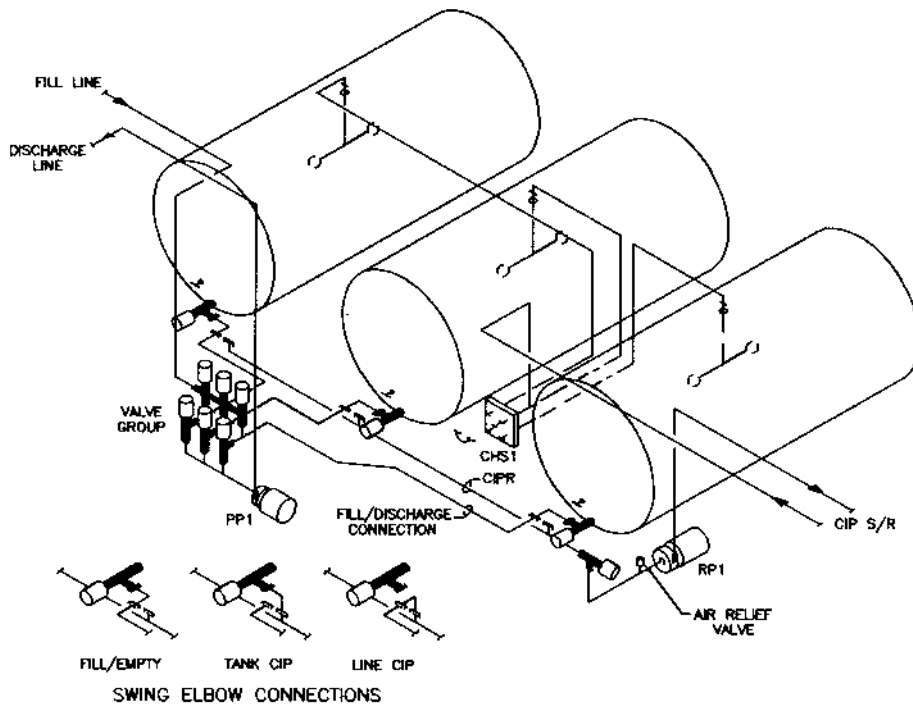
Compression type valves in manifolded assemblies for shop fabrication provide two fill paths and one discharge line for three tanks. Moveable elbows provide process/CIP separation.
